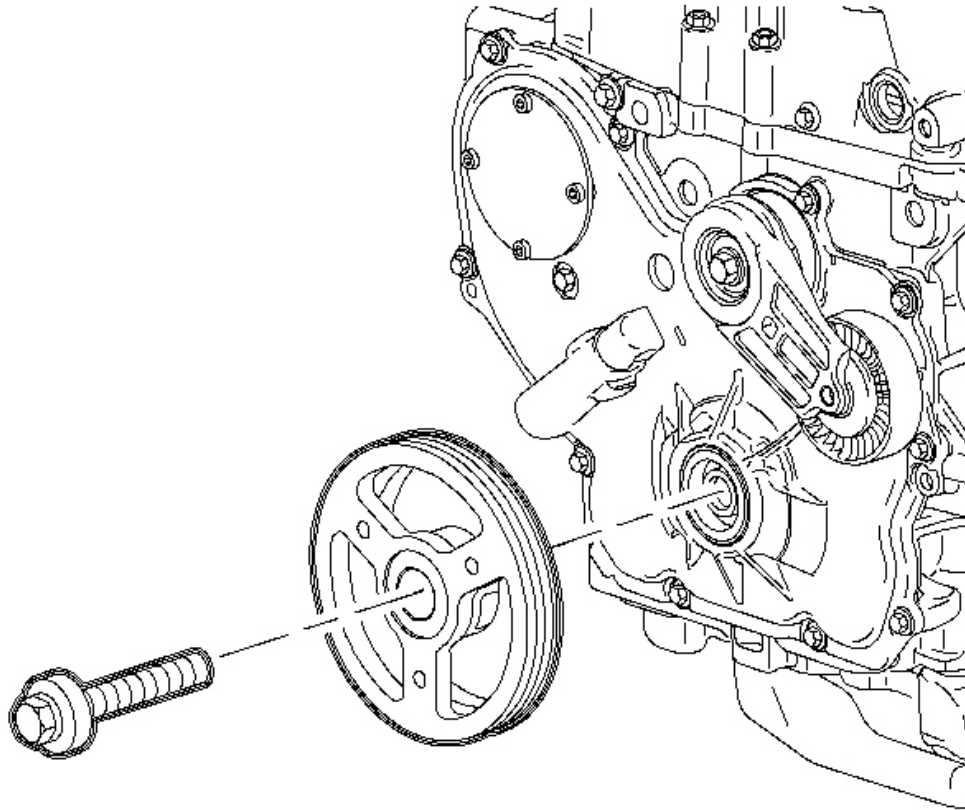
Removing/Installing Crankshaft Balancer Pulley Bolt
